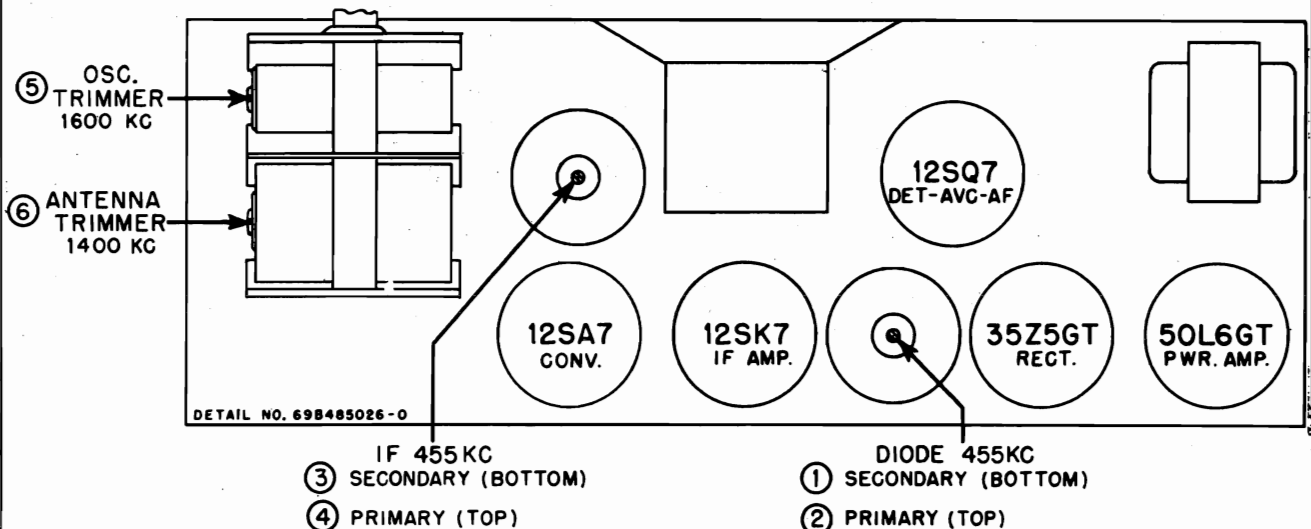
CHASSIS HS-125 TUBE & TRIMMER LOCATIONS
